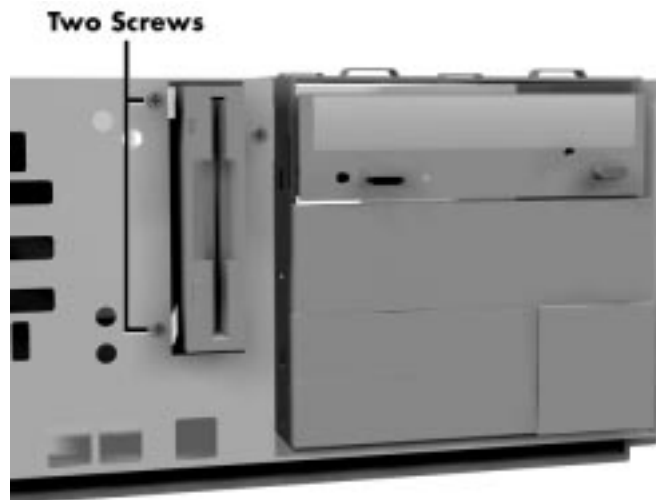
Removing the 5 1/4-Inch Device Screws
